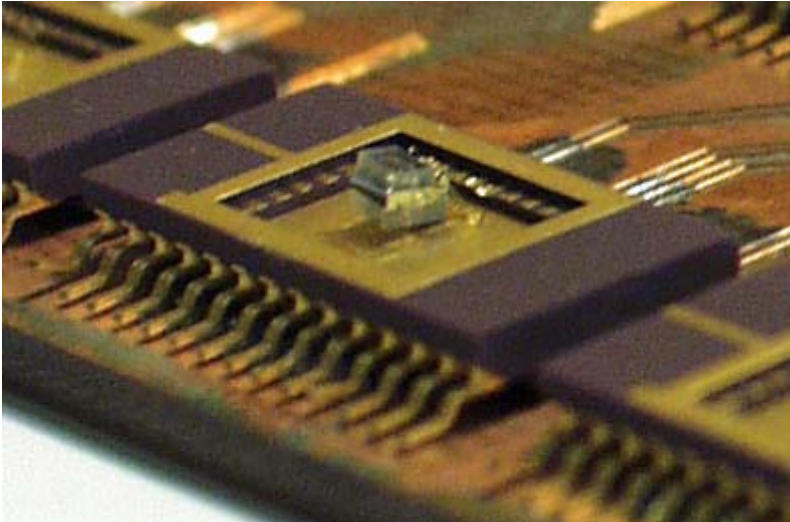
Bare Die assembled in a ceramic capsule. The sensor is hanging by the bonding wires.
